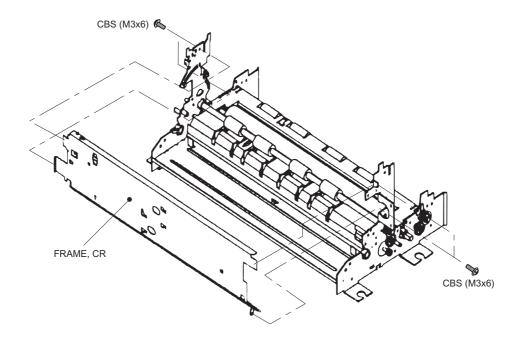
PAPER GUIDE ASSY. Removal (3)
